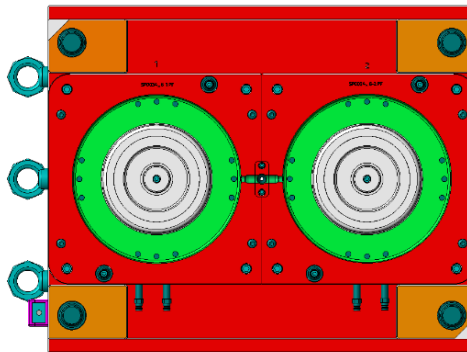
The two cavity inserts for A version wheel assembled in the stationary plate.
